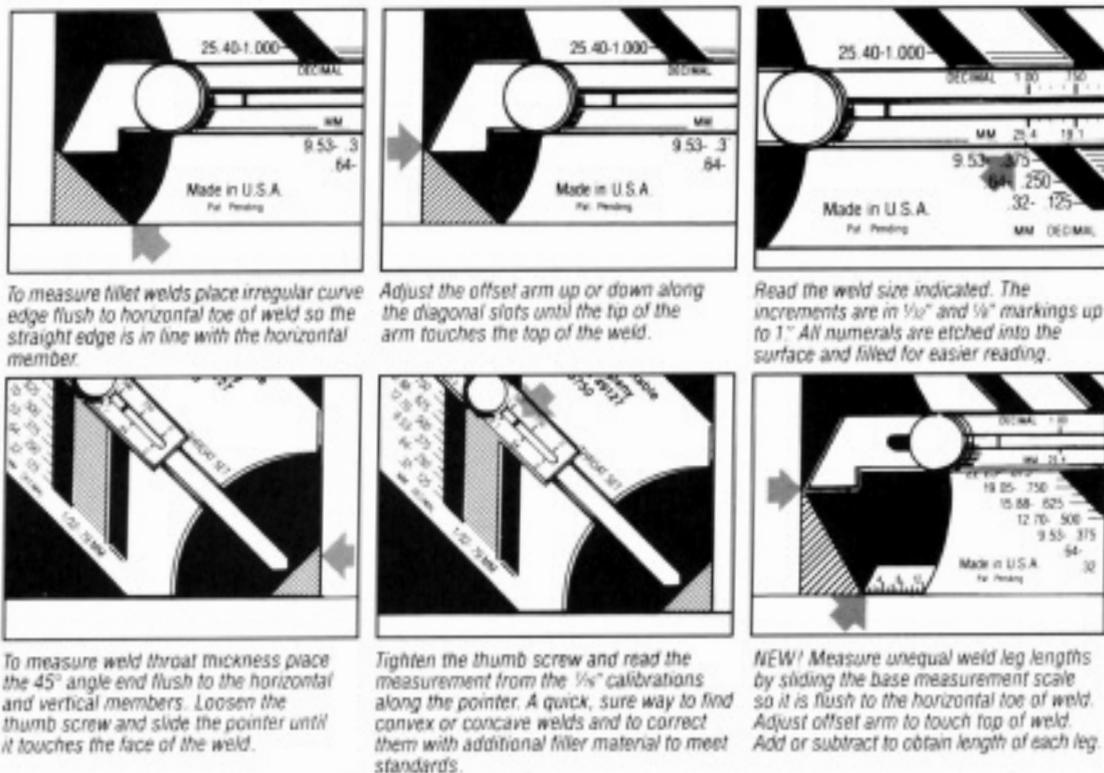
How to use an adjustable fillet weld gauge.
